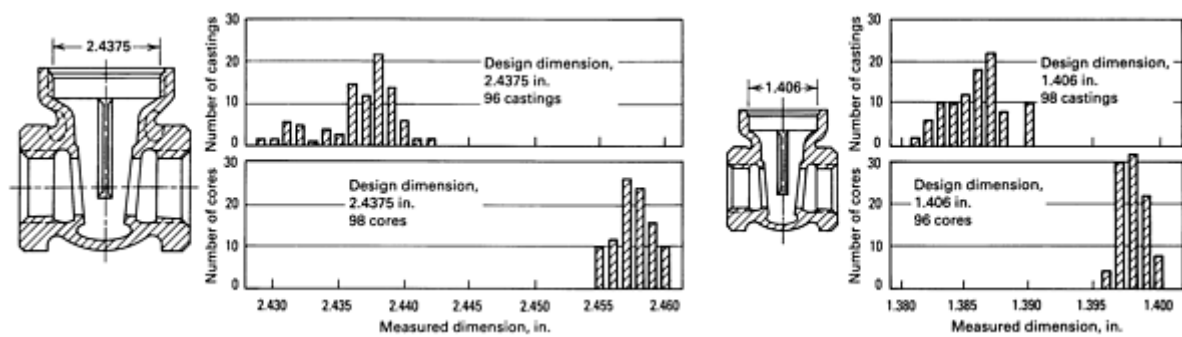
Variations from design dimensions for a typical red brass casting. Parts were cast in green sand molds made using the same pattern. All dimensions in inches
